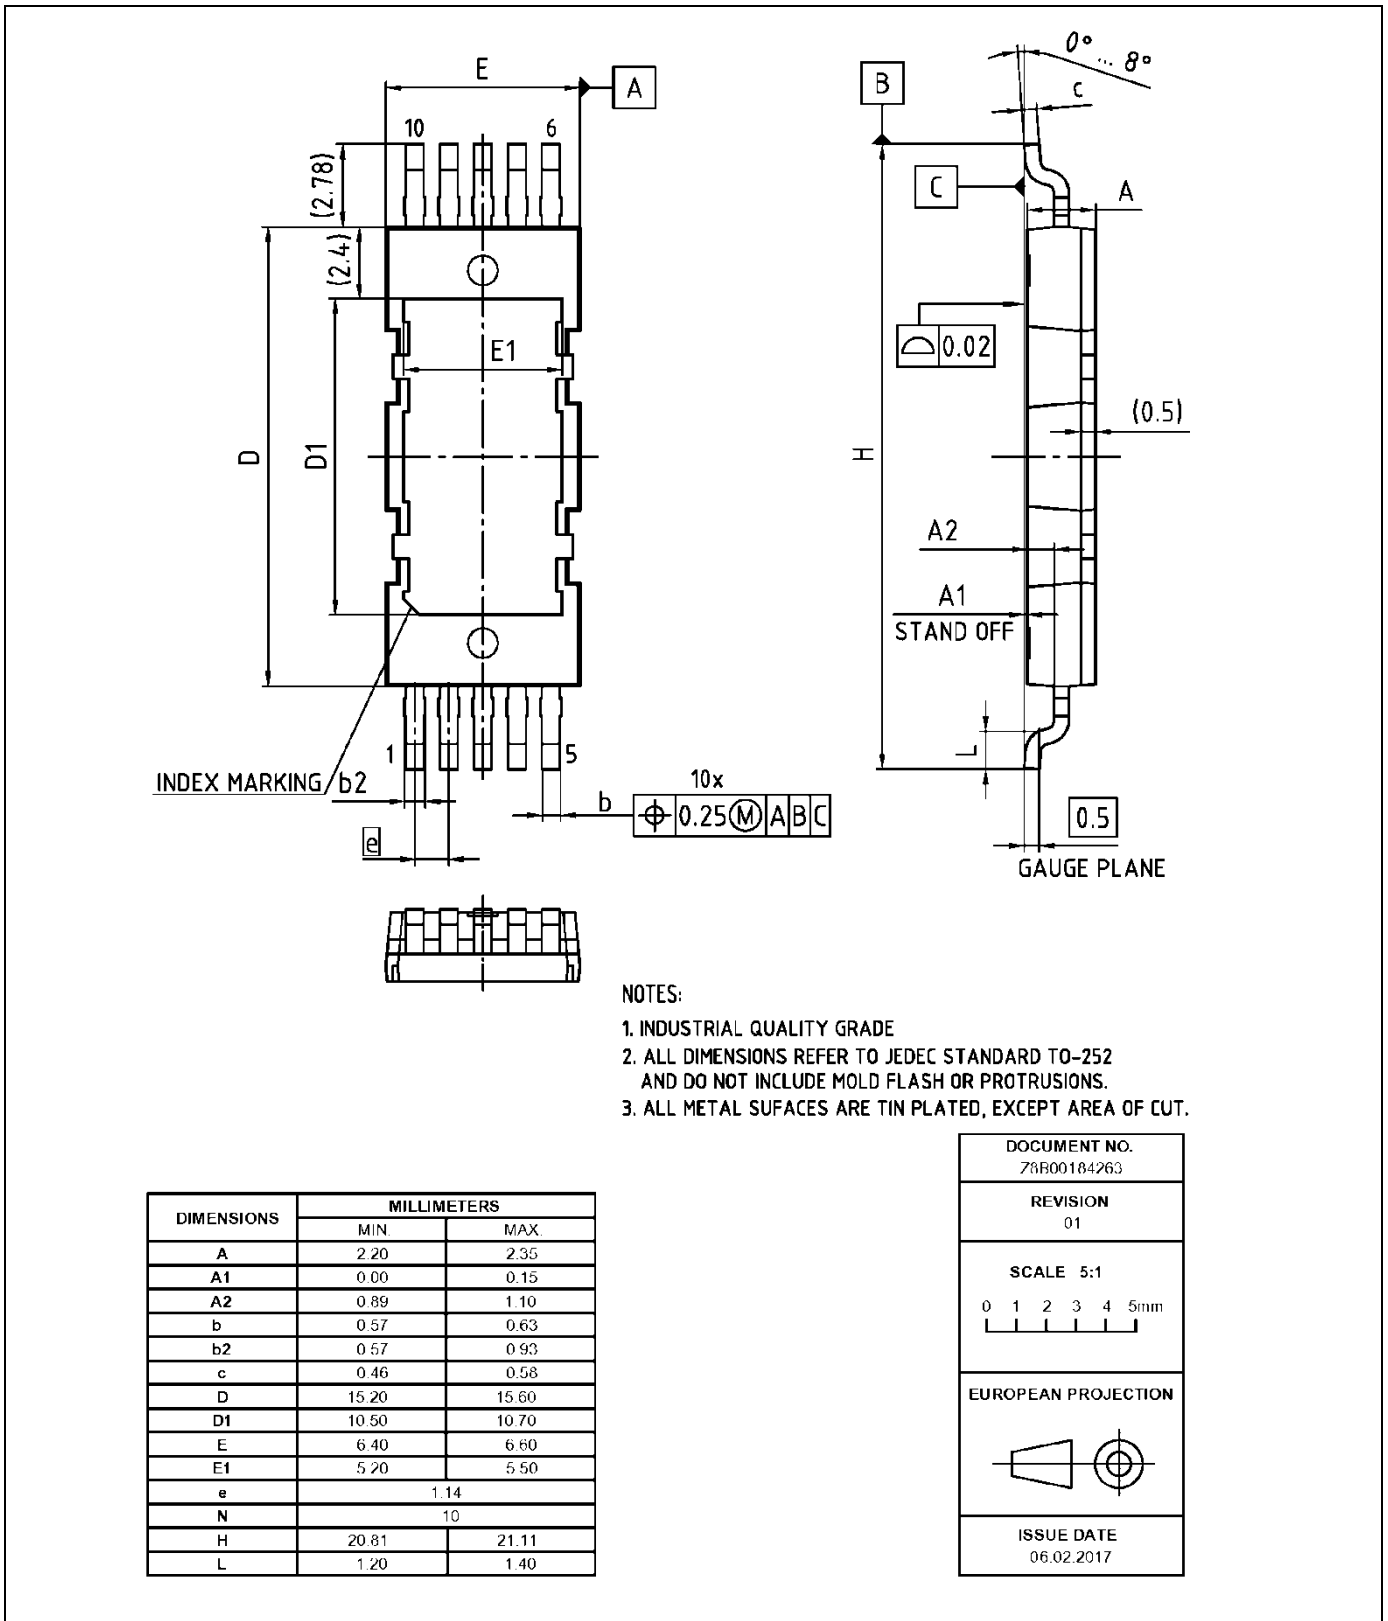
Outlines of the package PG-HDSOP-10-1, dimensions in millimeters
